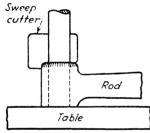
Finishing the end of an airplane-engine connecting rod with a sweep tool.
